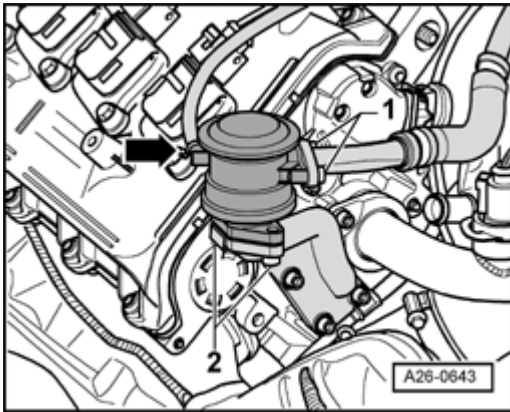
Disconnecting Vacuum Hose At Combination Valve To Be Tested
